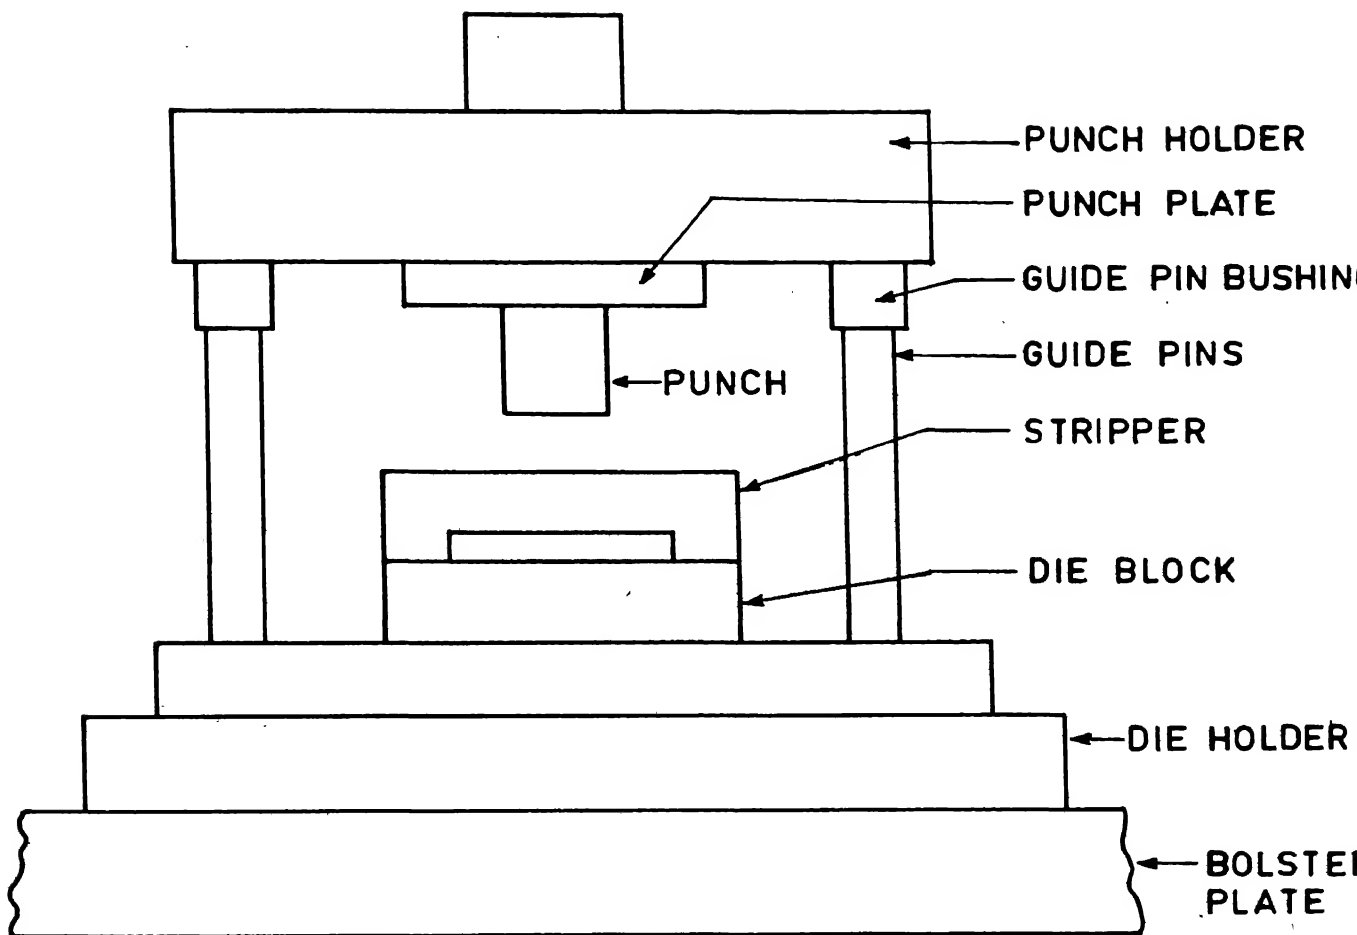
COMPONENTS OF A SIMPLE BLANKING DIE.
